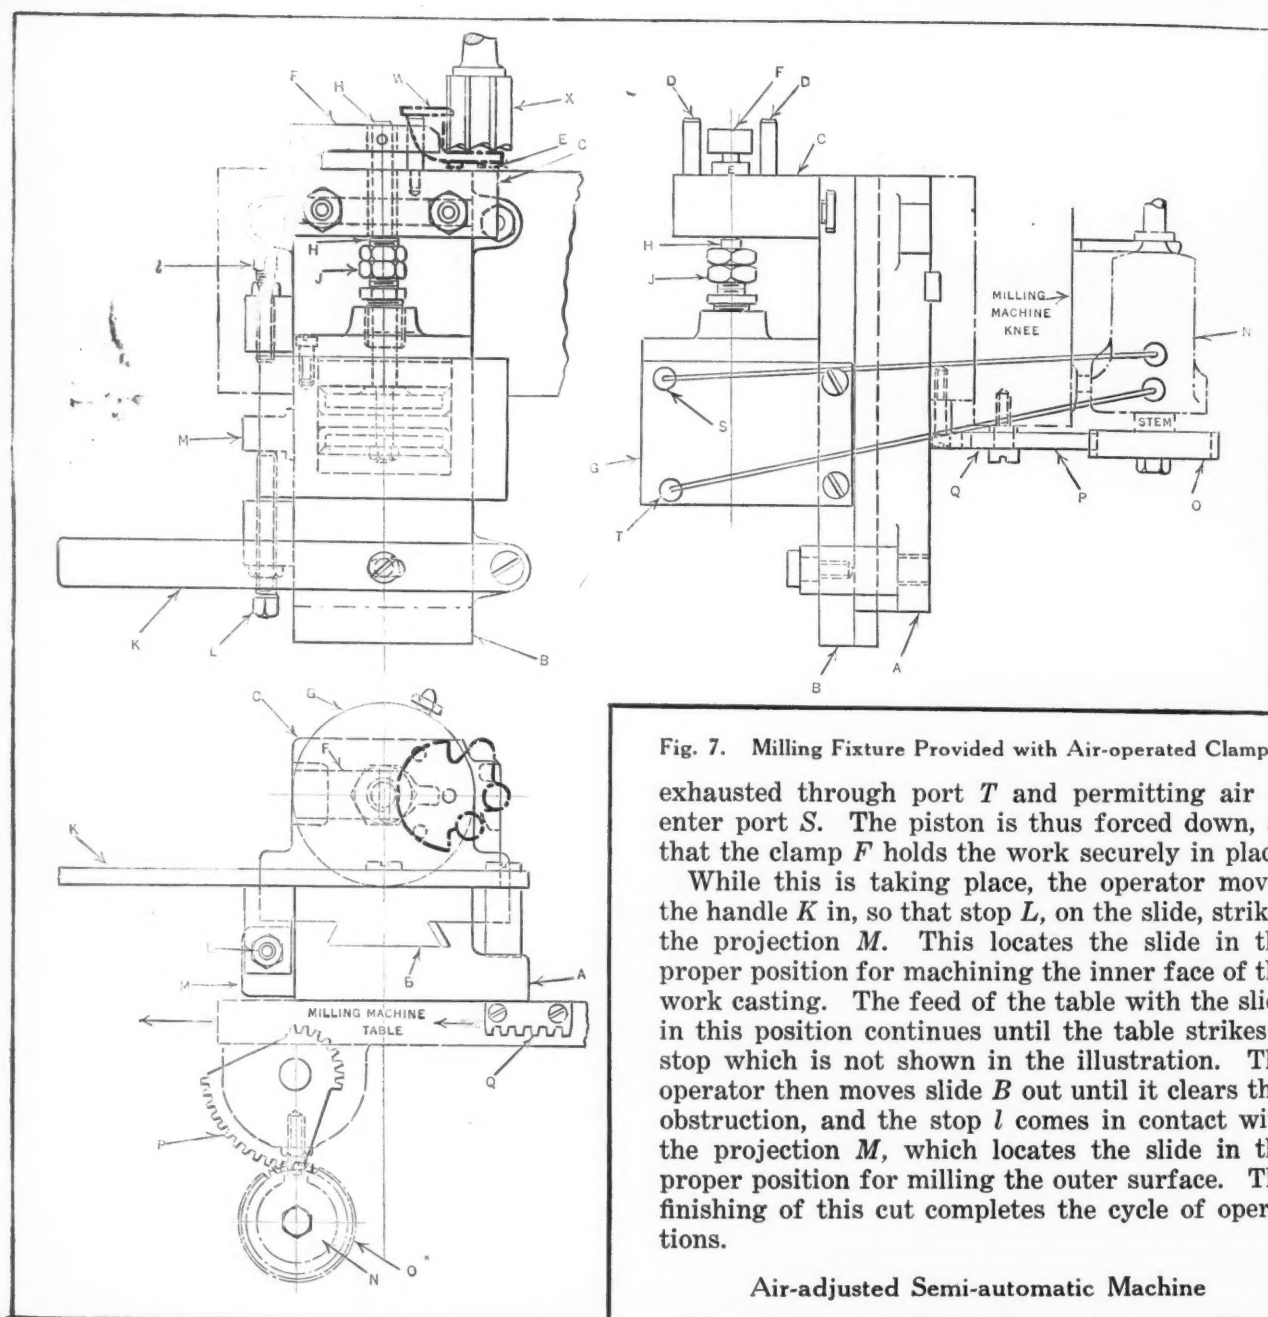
Milling Fixture Provided with Air-operated Clamp
